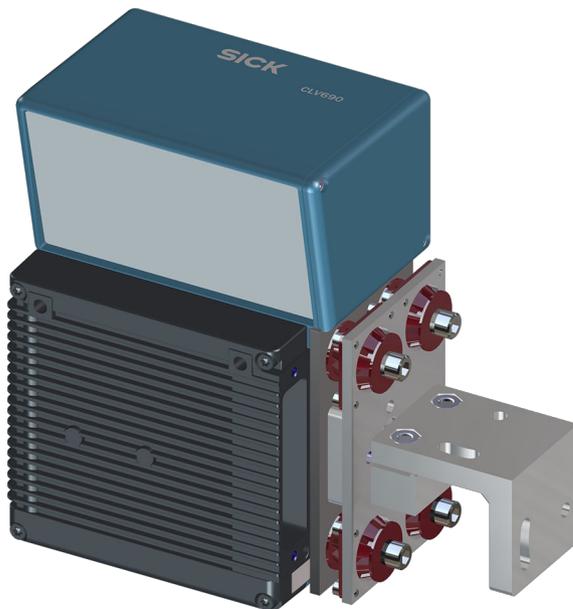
Shock mount with ball joint mounting on oscillating mirror device
